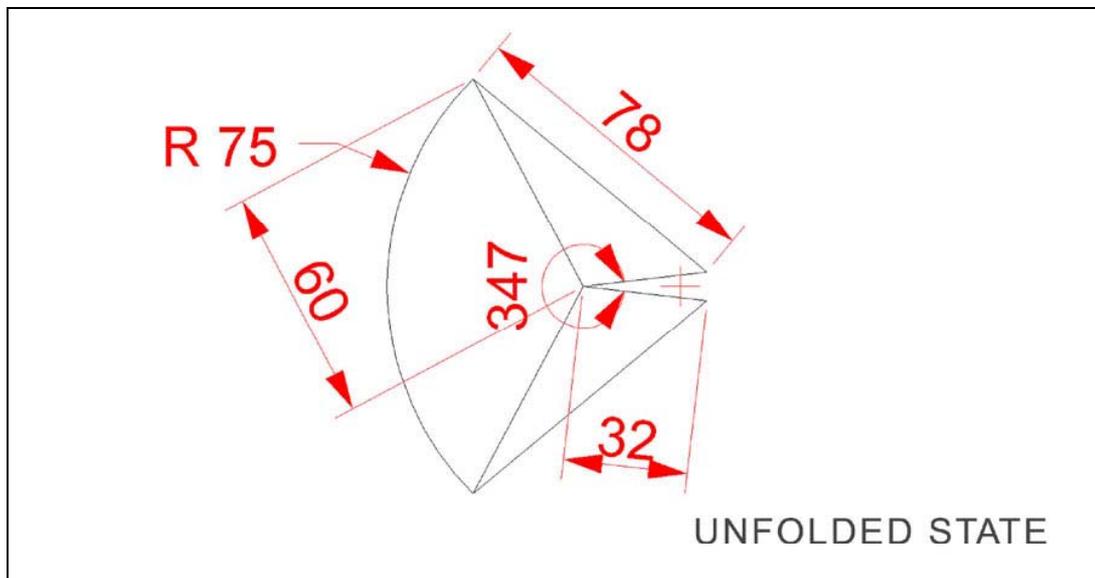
Technical drawings of one unit Pure in unfolded state (measures: mm, scale: 1/20)
